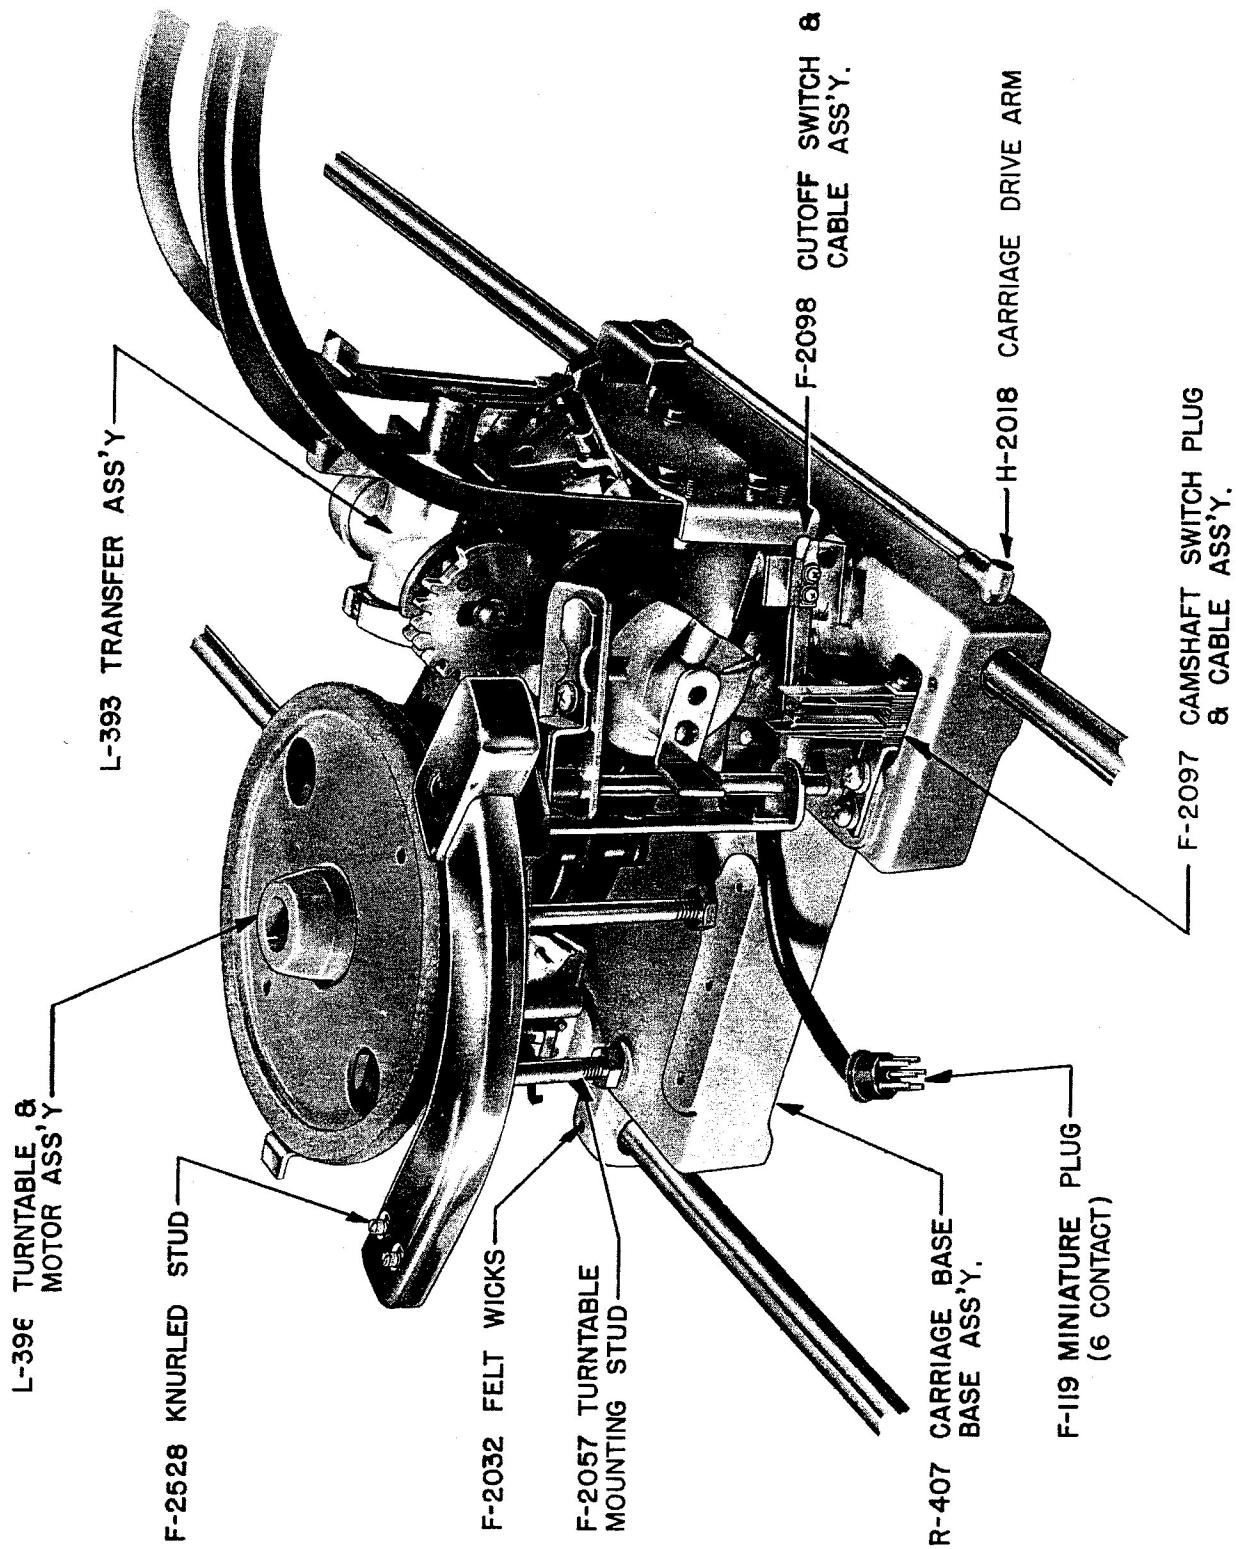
CARRIAGE - RIGHT SIDE VIEW
